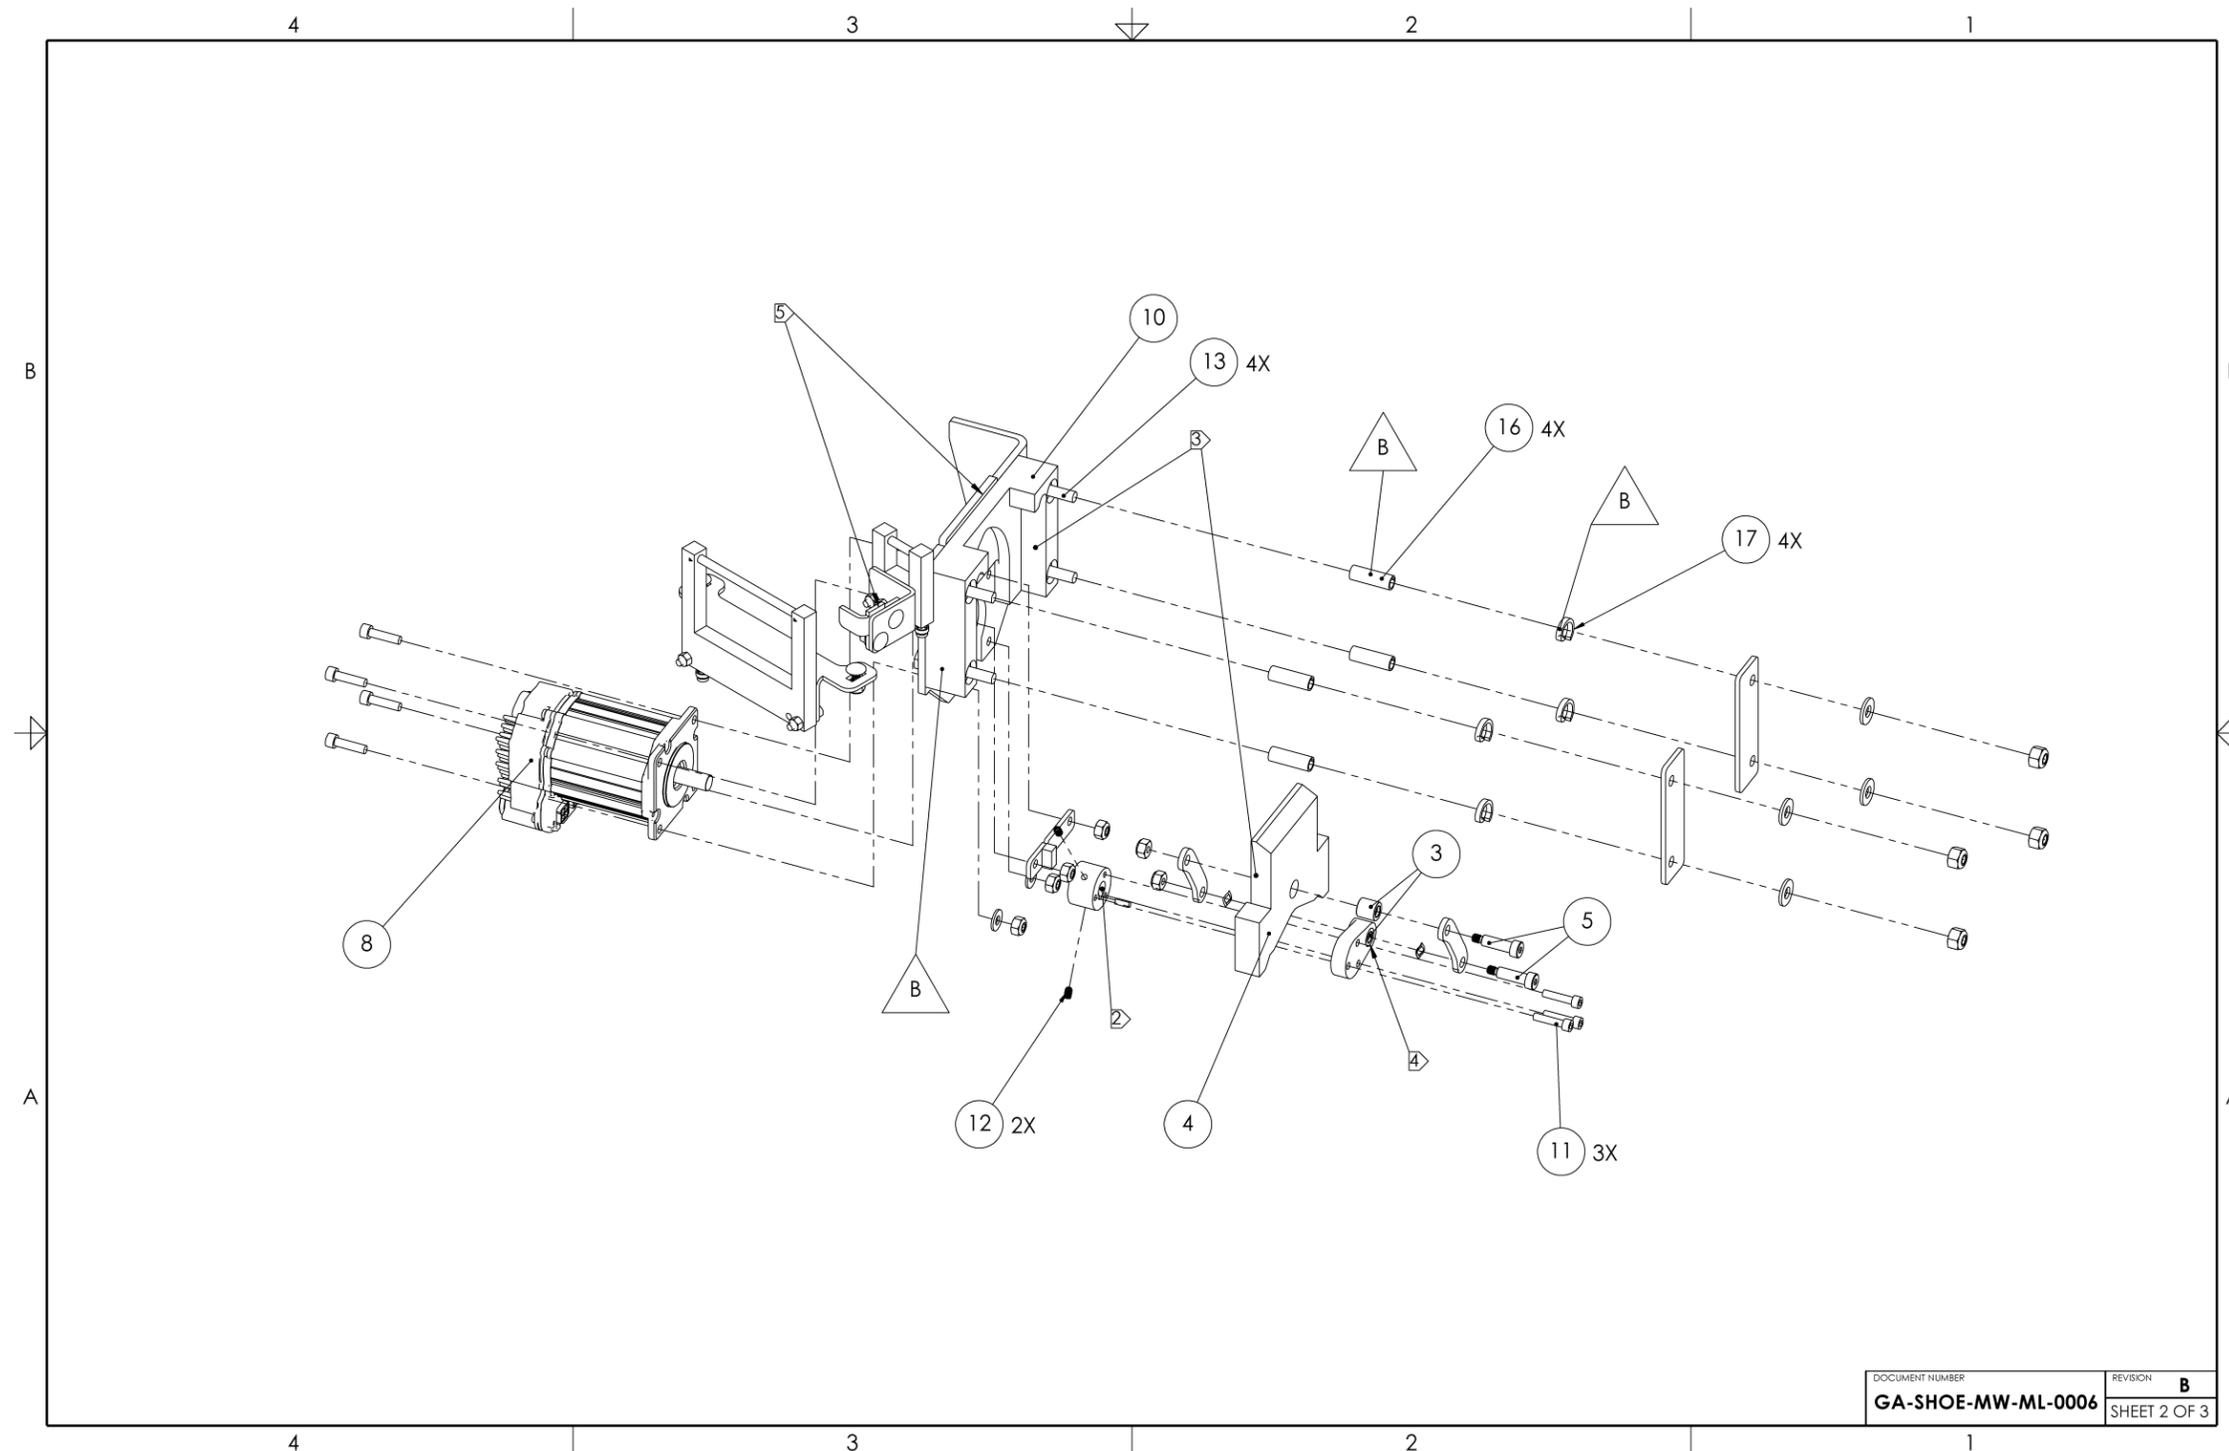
General Arrangement, Shoe Sorter Divert Switch, Sheet 2 of 3
